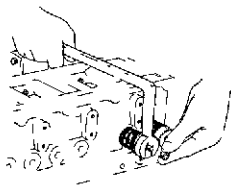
Removing Valve Spring Retainer Locks X4929
